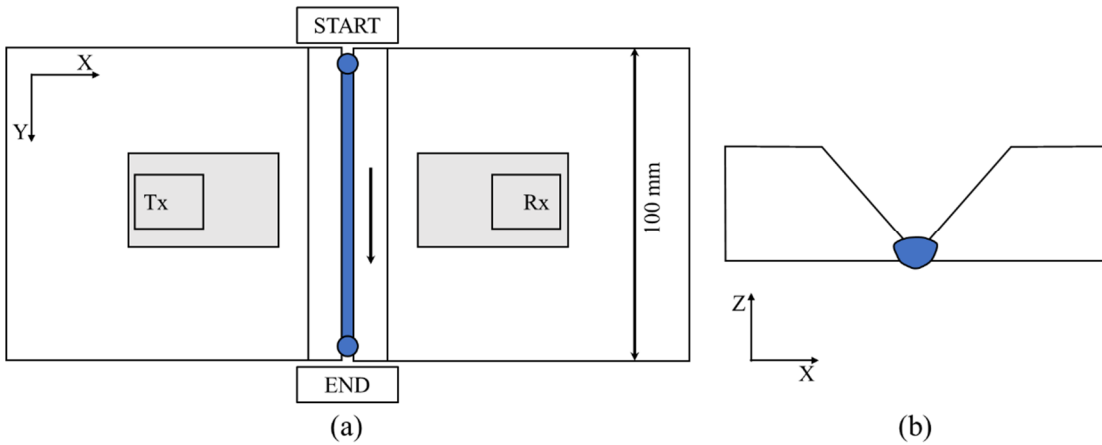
Schematic view of experiment 2 showing position of weld in relation to probes in both a (a) plan and (b) section view [144]
